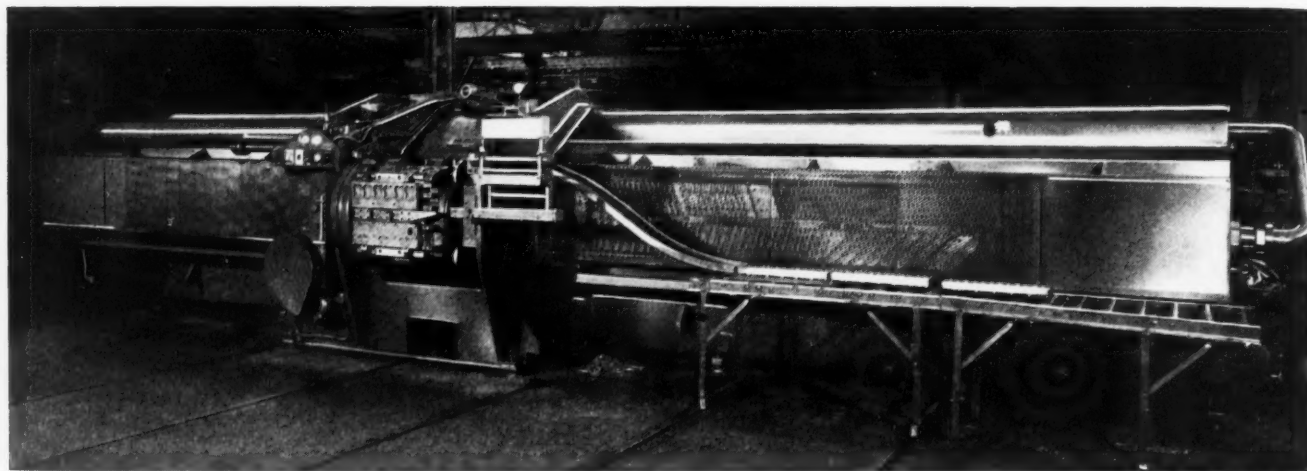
Special Horizontal Broaching Machine Equipped with Drum Type Fixture for Broaching Cylinder Heads
